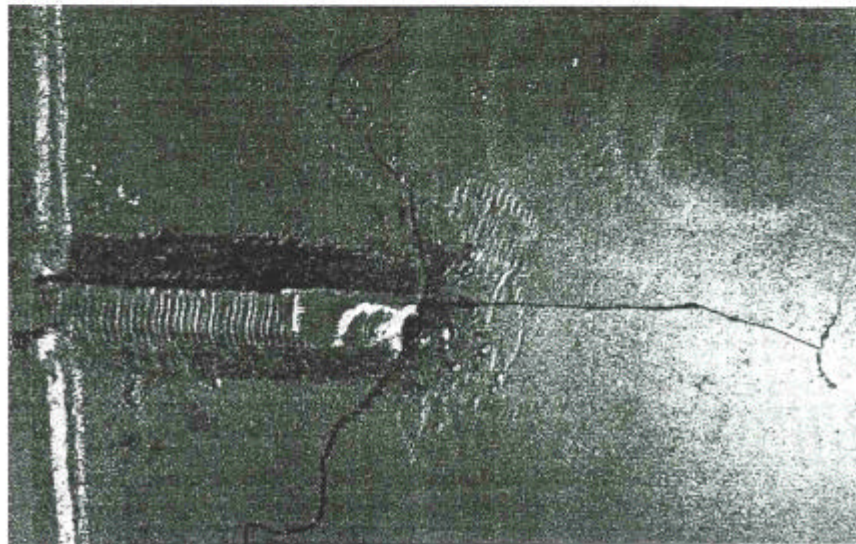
Cracked rotor blade fork of Magnox gas circulator
